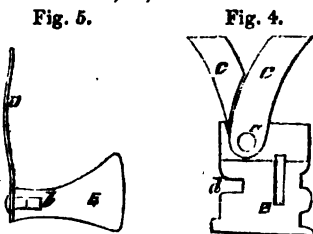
in fig. 1. A A is the lock-plate; B a slide for shooting and withdrawing the bolts, C C, which are centred on a pin, a, fixed in the slide; D a spring pinned to the back of the tumbler, E, which is armed with a
